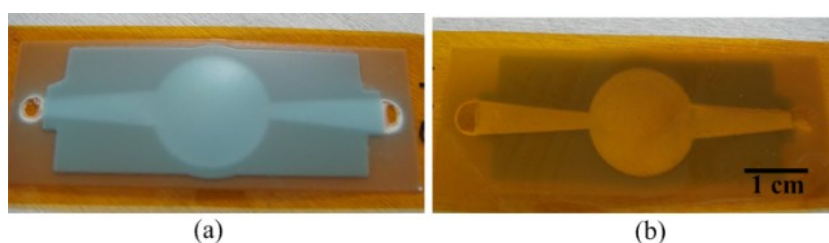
Example removal results of a single device viewed from (a) the top and (b) bottom (15 prints).
